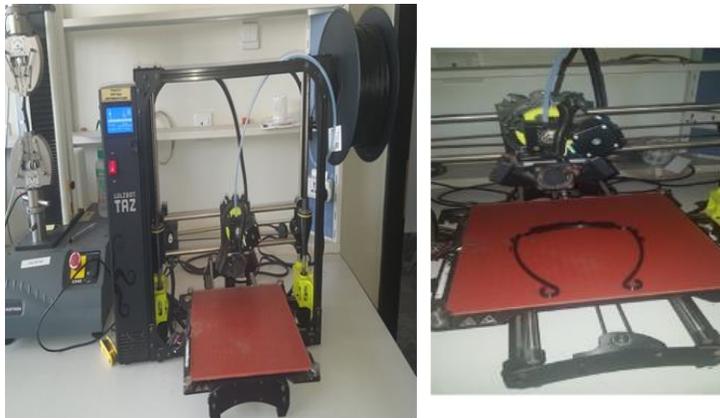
Lulzbot Taz 6 3D printer at AUST and printed faceshield bracket on printing bed.
